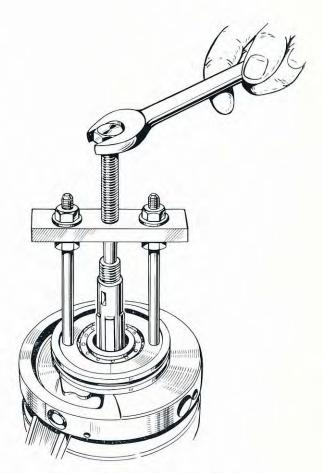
Using tool No. 61–3778 to remove the roller bearing inner race.
